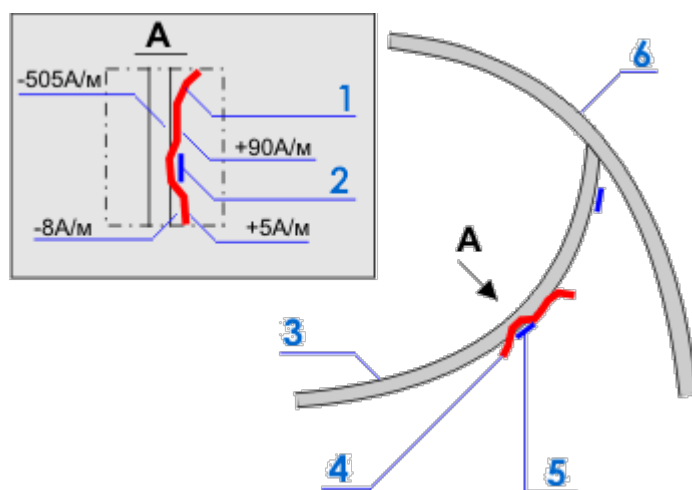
The disposition of detected cracks: 1, 4 - SC line ($H_p=0$); 2, 5 - crack; 3 - radial weld; 6 - girth weld.
